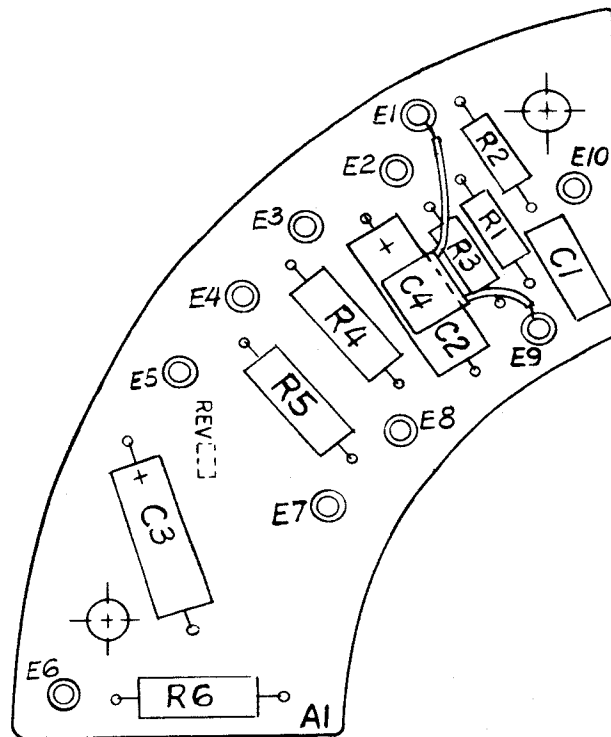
Tuning Rotor Assembly A2A4MP47, Component Locations
